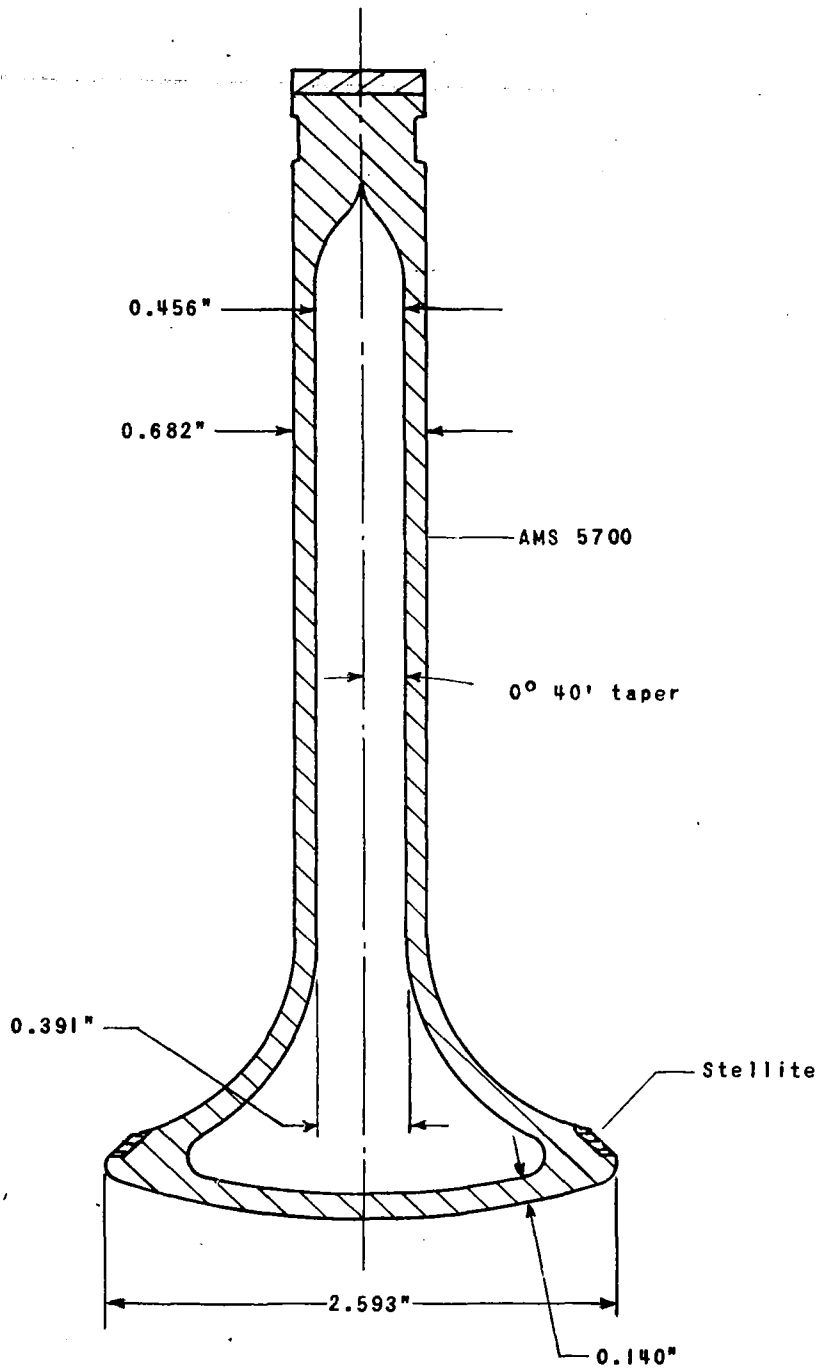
Details of exhaust valve equipped with a "one-wire" thermocouple.
